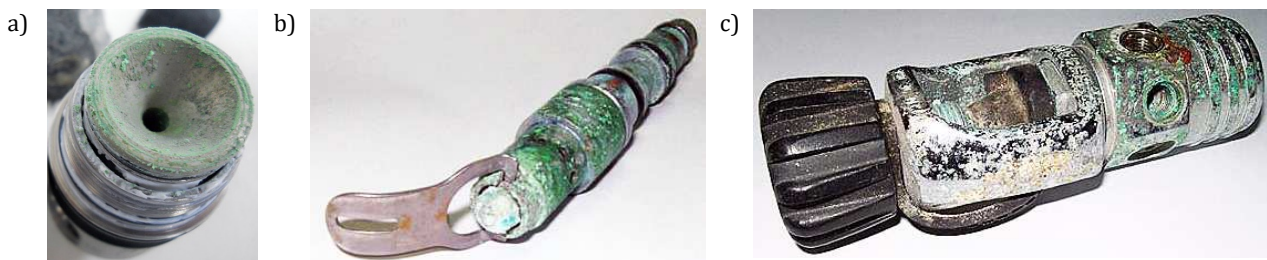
Examples of deterioration of diving technology elements caused by corrosion processes:
